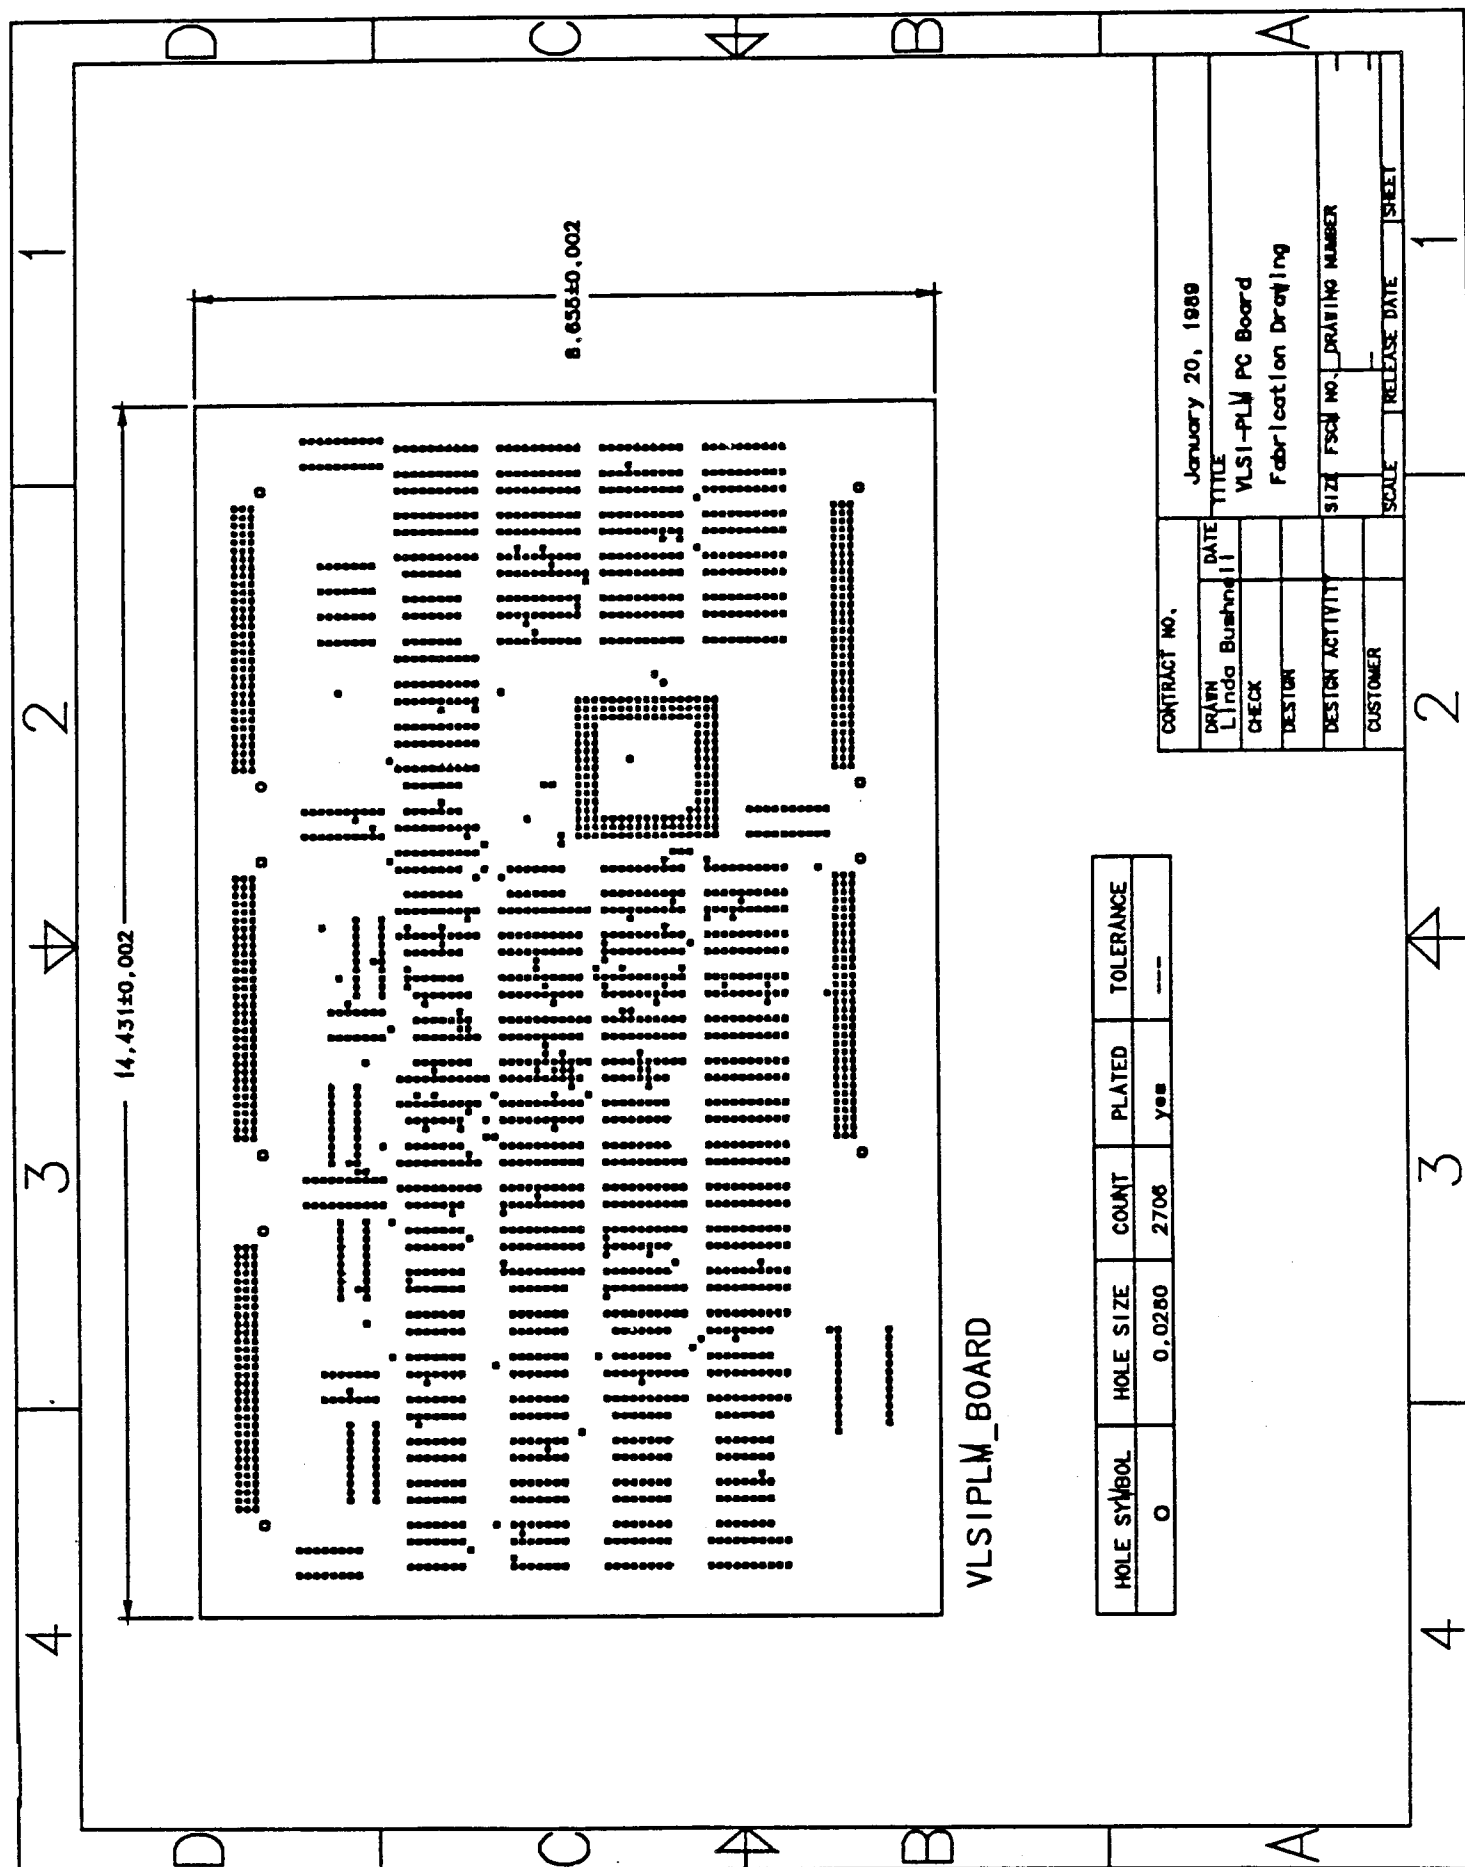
VLSI-PLM PC Board Fabrication Drawing
